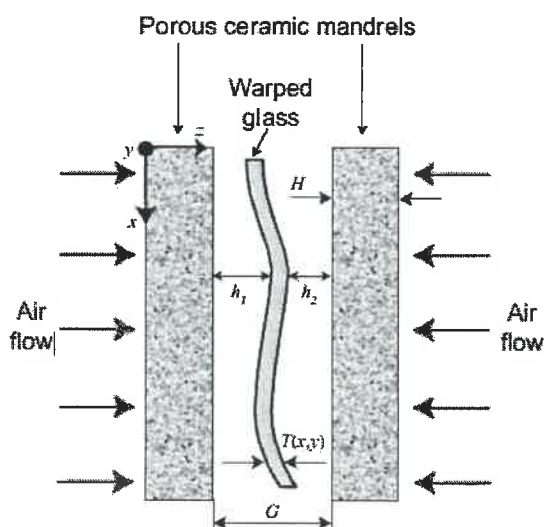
Thin glass sheet placed between two ceramic bearings, with air flowing through mandrels and against the sheet to change its surface topography. Assembly apparatus not shown.
